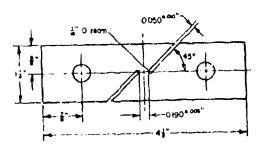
SHEET SHEAR TEST SPECIMEN
